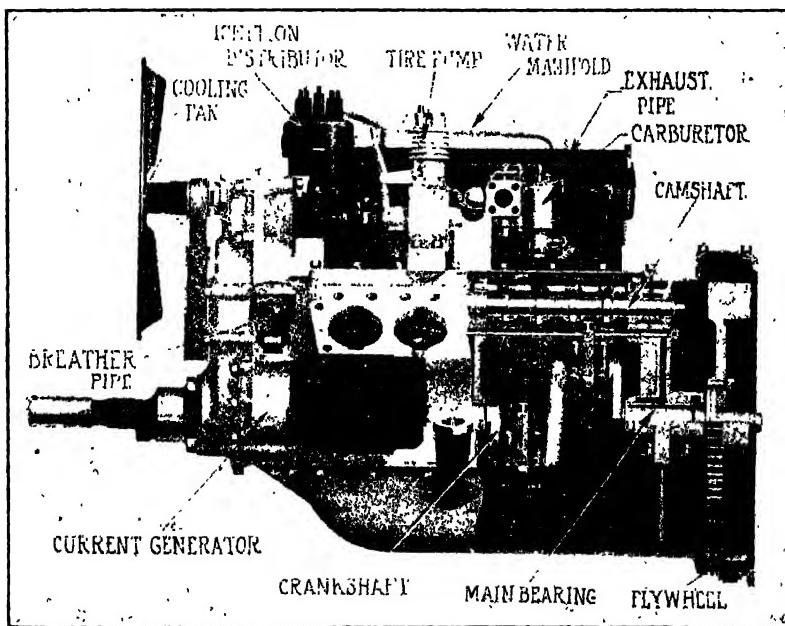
Longitudinal Part Sectional View of King Eight Cylinder Motor, Showing Important Parts.
